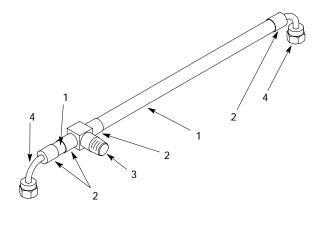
PUMP TO BOOSTER TANK TUBE ASSEMBLY
